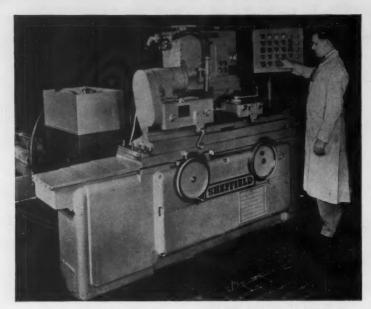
Crush-grinding machine being introduced by Sheffield Corporation
